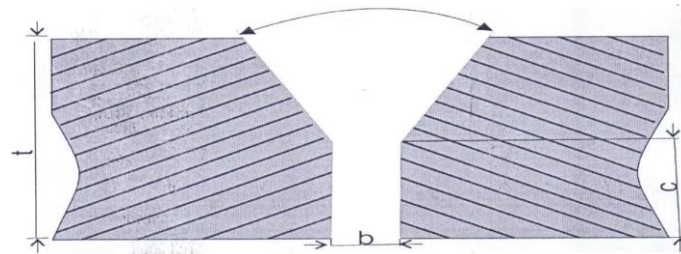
Cross-section of the single-V butt joint edge preparation (t = base-metal thickness; b = root opening; c = root face thickness; a = groove angle).
